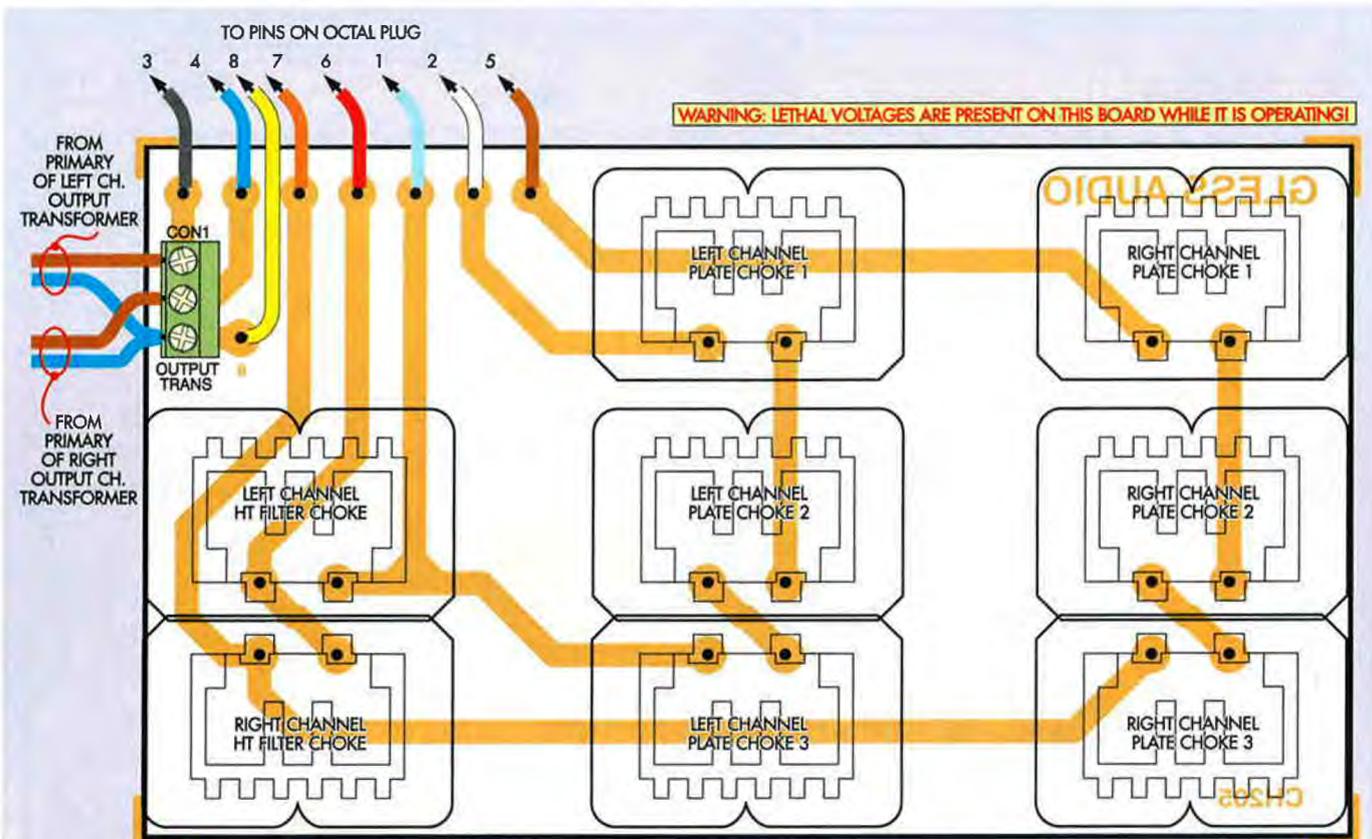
here's how the eight chokes are installed on the PC board which sits on top of the chassis. The output leads go to an octal plug – see Fig.7.
